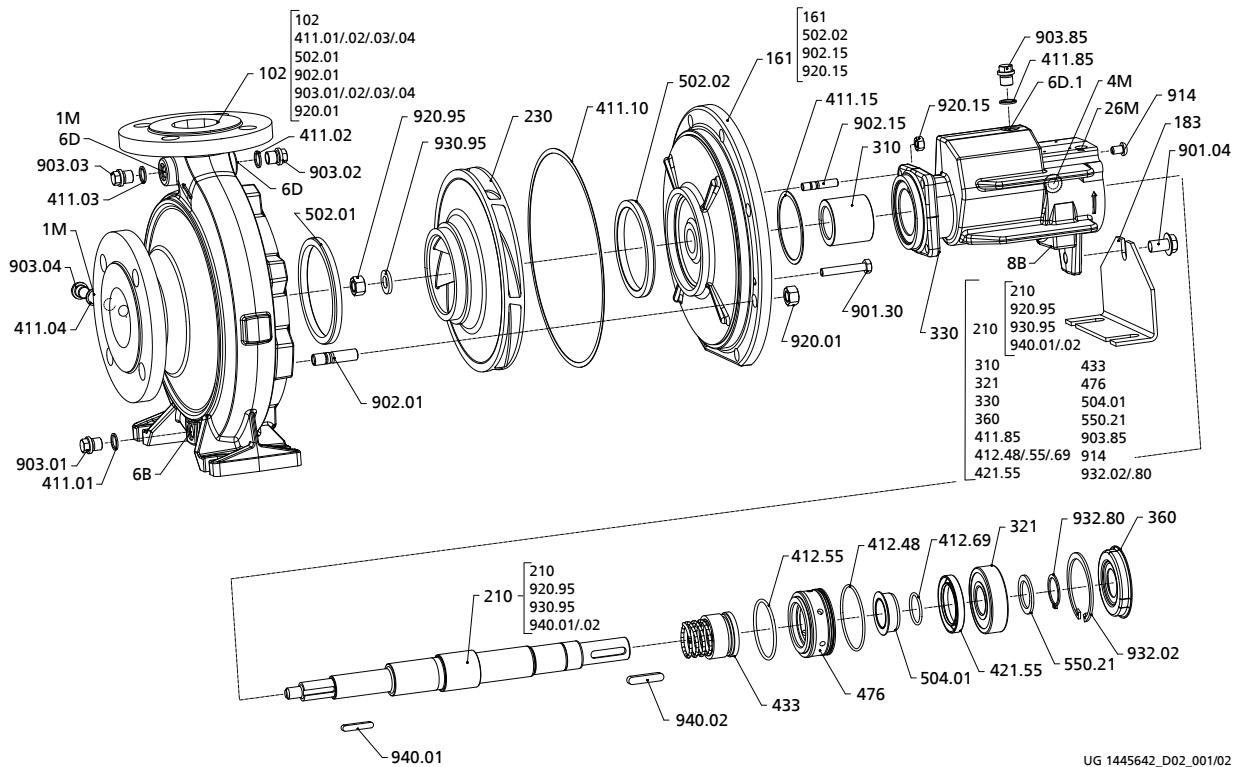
Exploded view of an Etanorm SYT, bearing bracket WS\_25\_LS
